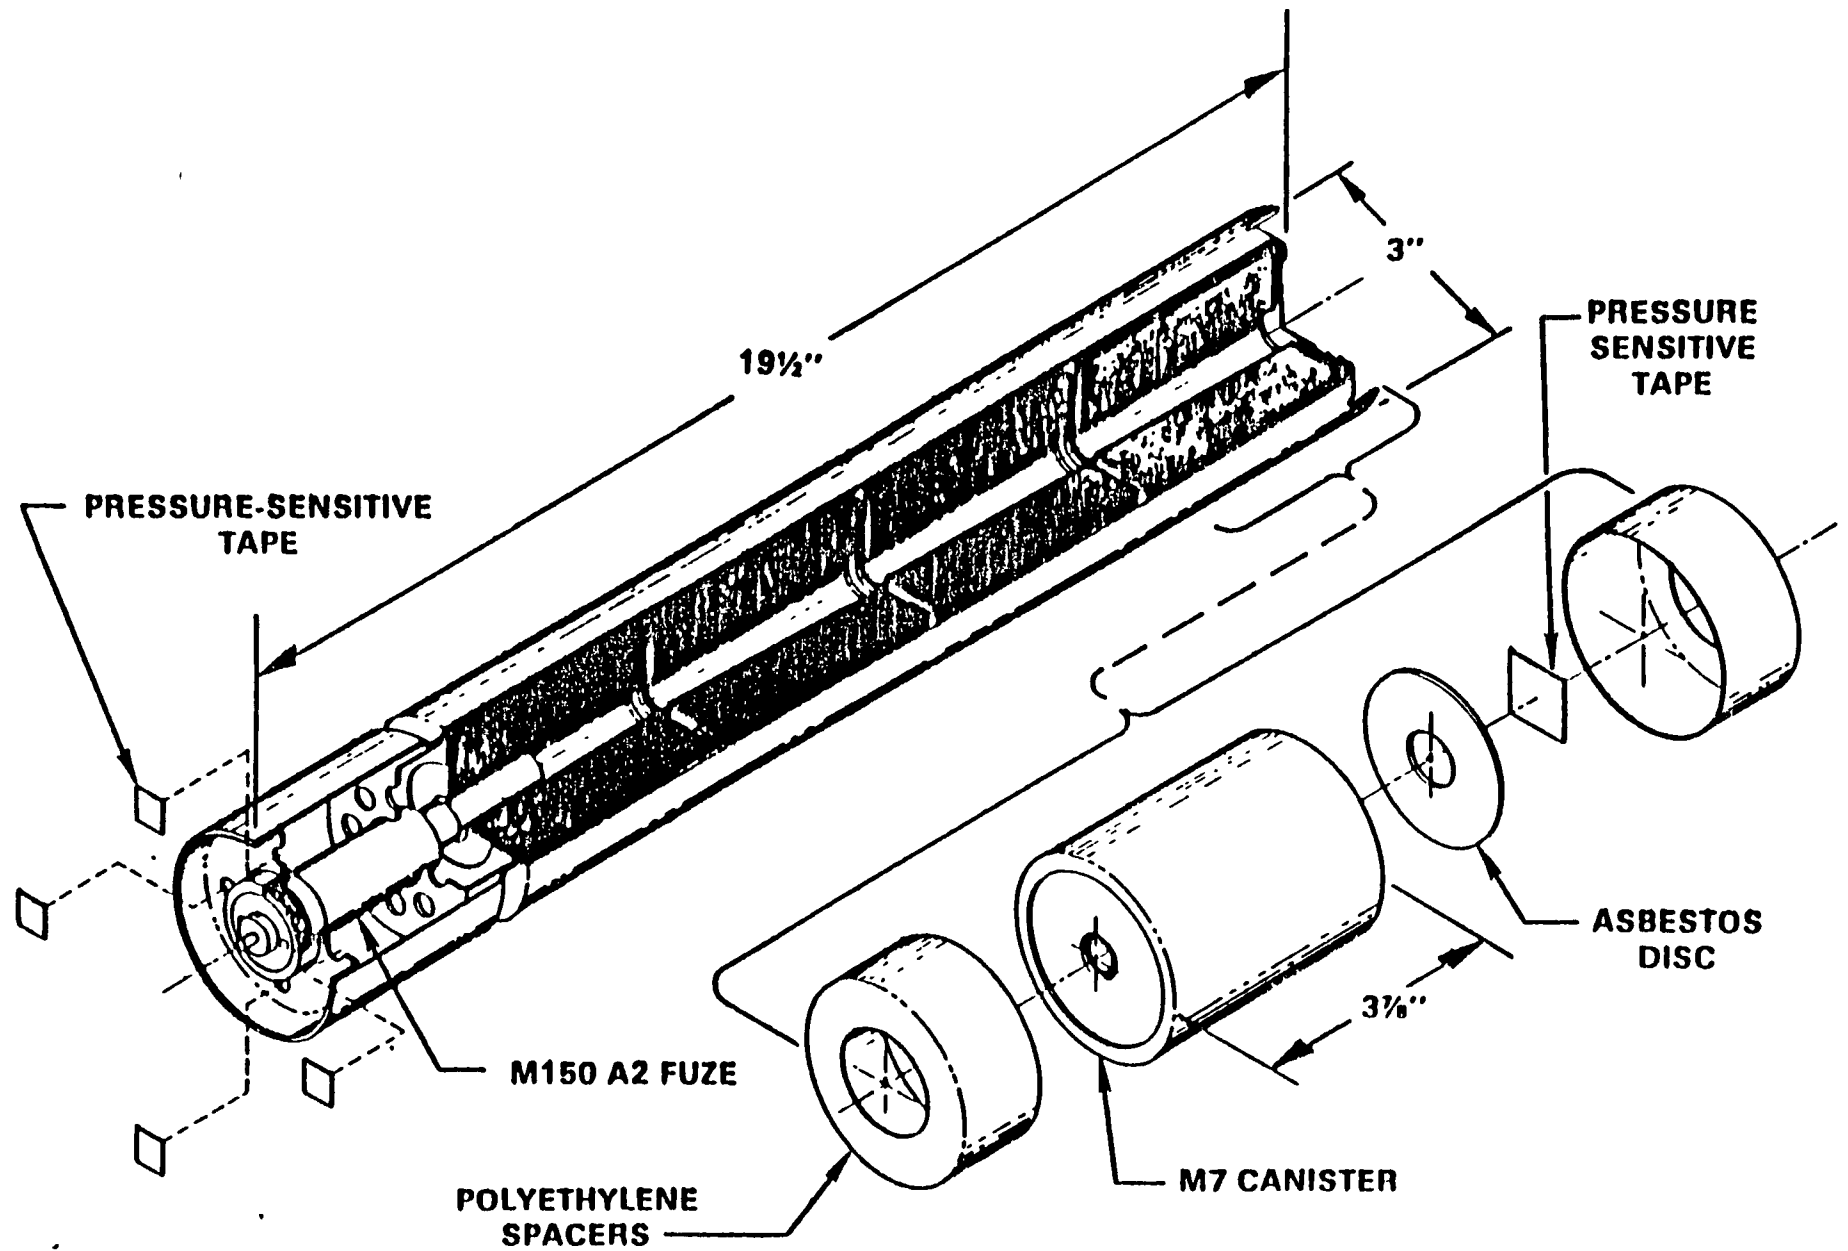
M138 BZ BOMB ASSEMBLY
